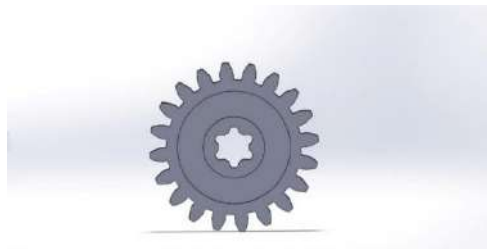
Modeling of 20 gears in SOLIDWORKS 3D environment
